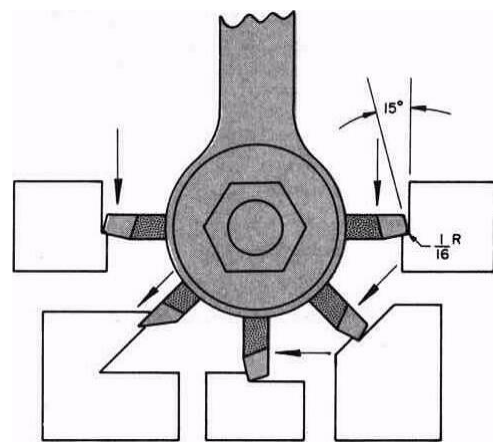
Tool positions and types of cuts possible with a shaper or planer toolholder.
